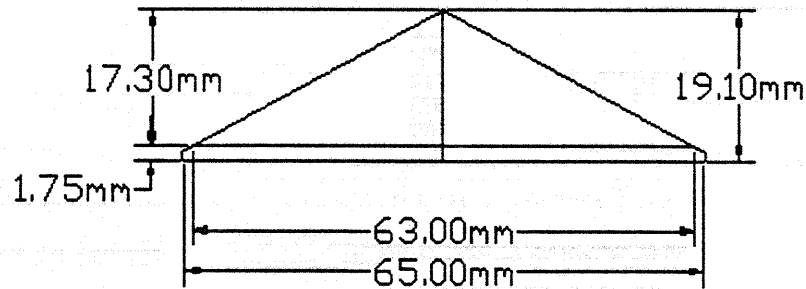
Side view of pentroof cylinder and dimensions to cut for cylinder head reduction
